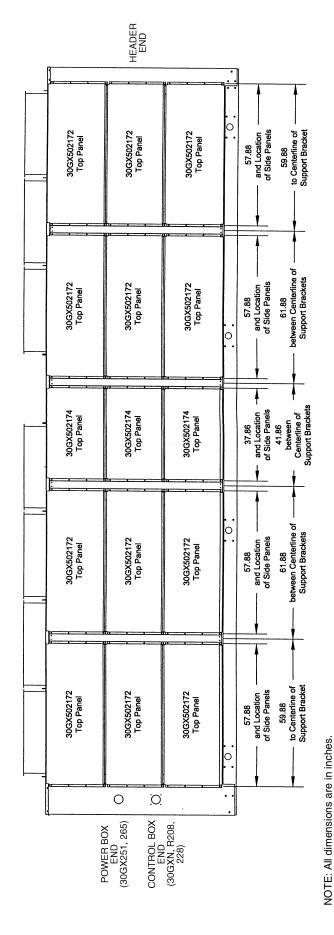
J — Unit Assembly, 30GX251, 265 Cooler Side Only and 30GXN,R208, 228 Both Sides
